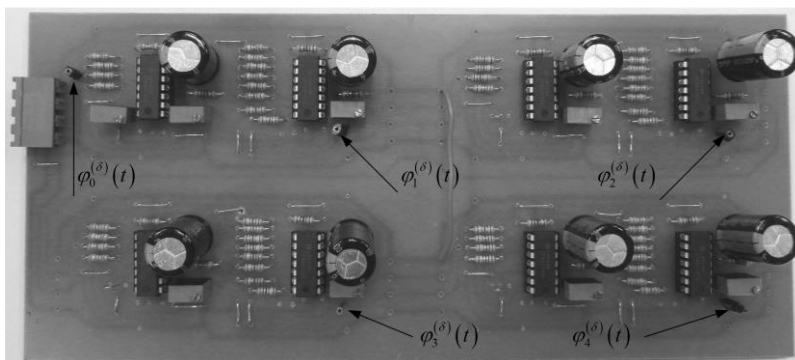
Improved almost orthogonal Legendre type filter - printed circuit board
